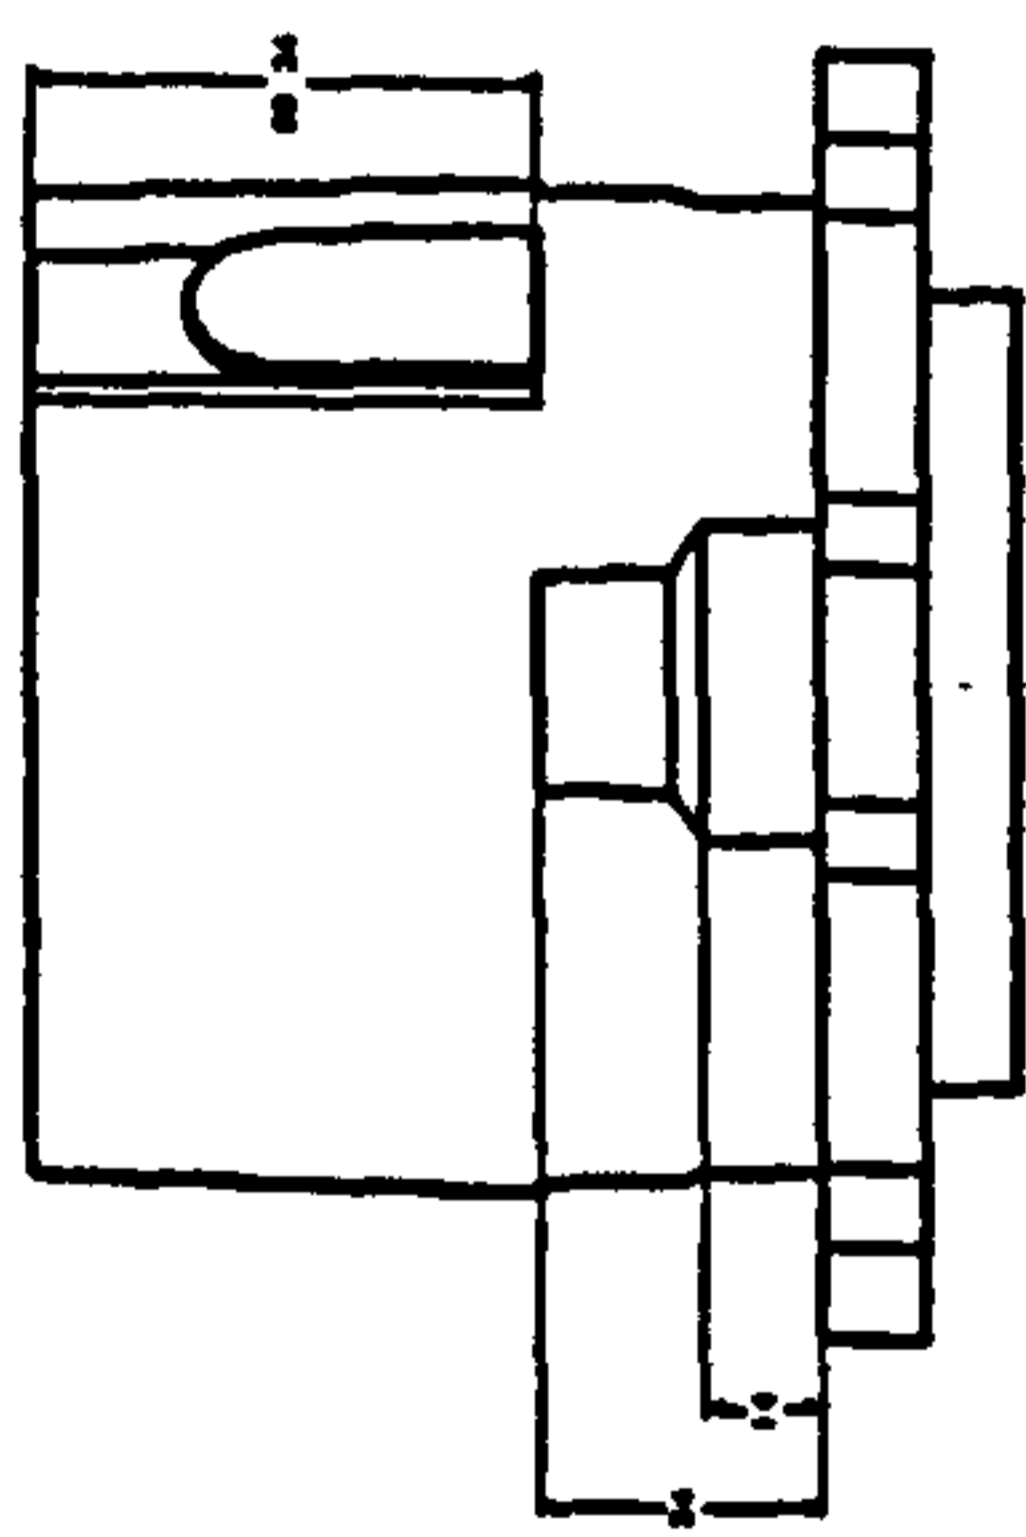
Drive-End-Shield No. V6211-695 - Manufacturing Drawing
